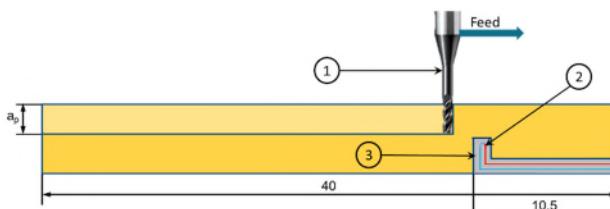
Thermocouple attachment and subsequent machining. (1): End mill tool, (2): Thermocouple, (3): Thermal grease.
